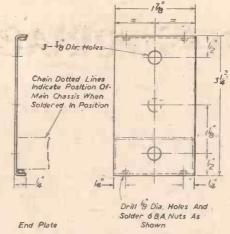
Further chassis details. The dust-iron cores in the tuning
